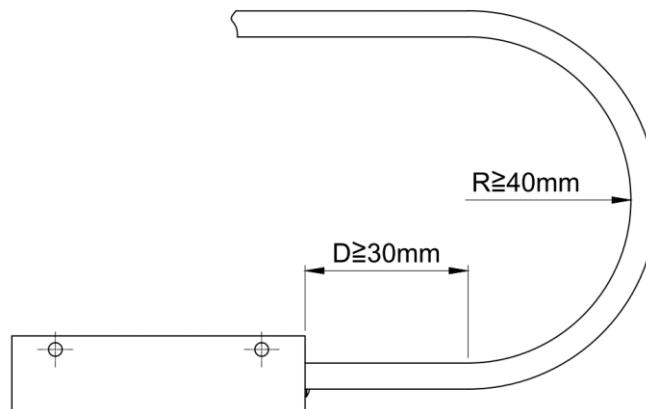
Specifications of outlet and bending radius for incremental position measurement
